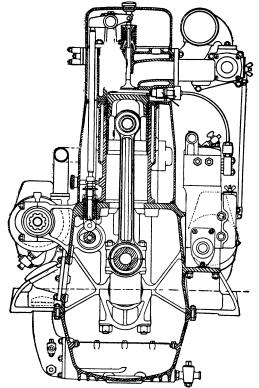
M.A.N. Open Chamber Diesel Engine.
